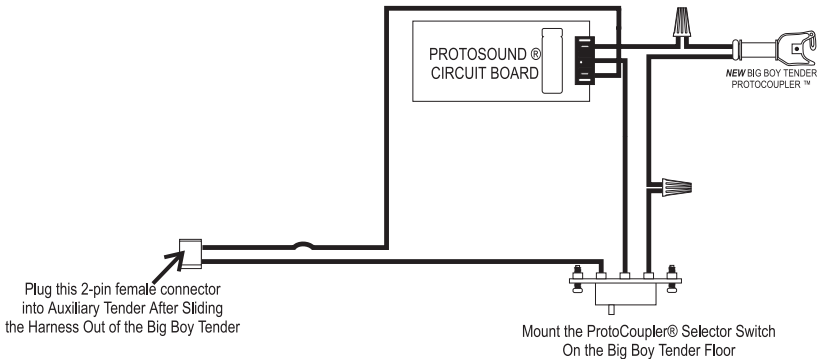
Wiring up the Auxiliary Tender ProtoCoupler® Harness to the Proto-Sound® Board.
